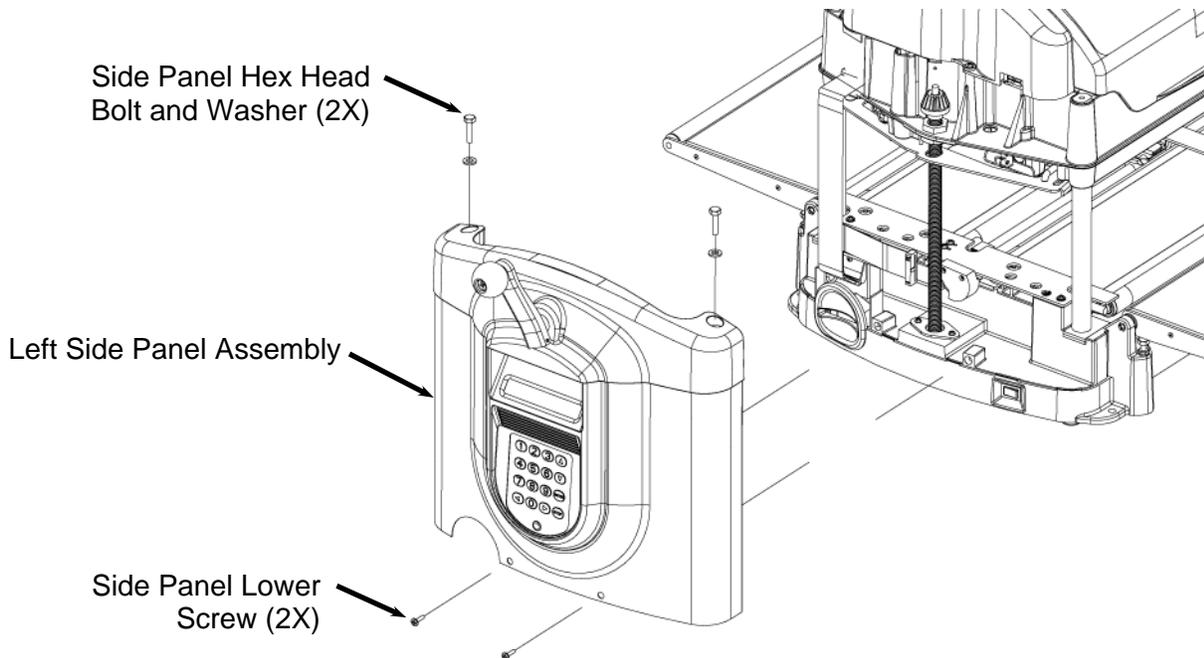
EXPLODED VIEW OF THE LEFT SIDE PANEL FASTENERS
